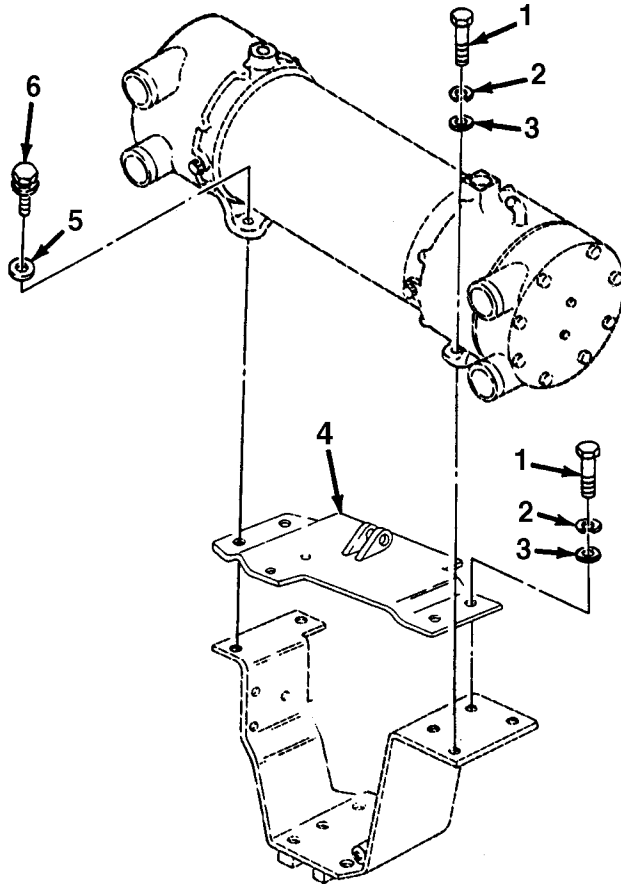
Transmission Oil Cooler, Mounting Bracket, and Related Parts.
